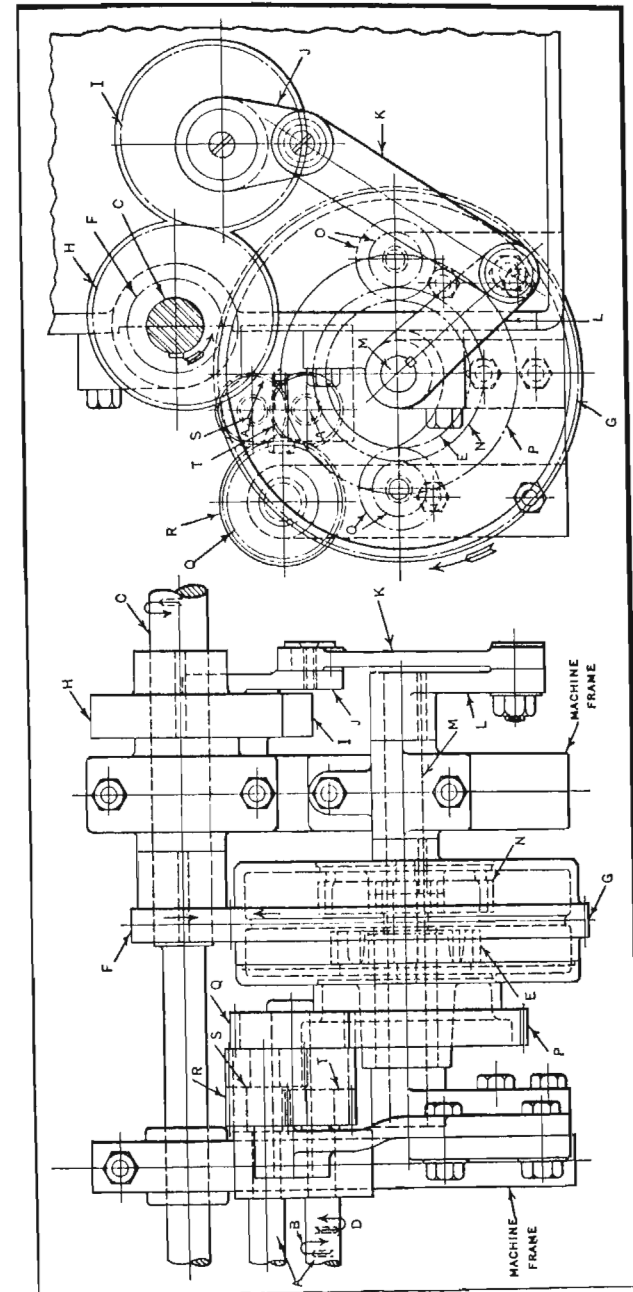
Special Design of Differential Mechanism for Transmitting to Feed-rolls a Variable and Reversing Rotation
